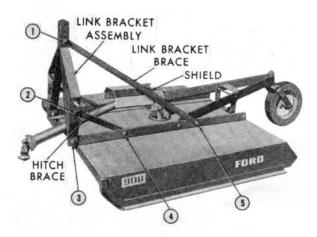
Series 908 Cutter Assembled with Gauge Wheel
